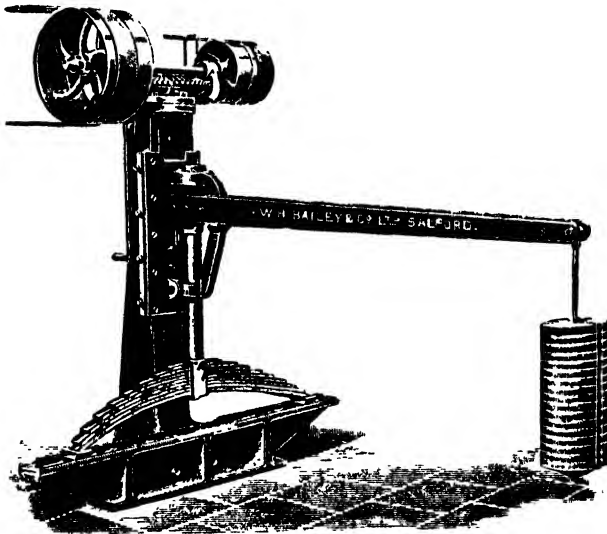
THE BAILEY SPRING TESTING MACHINE
